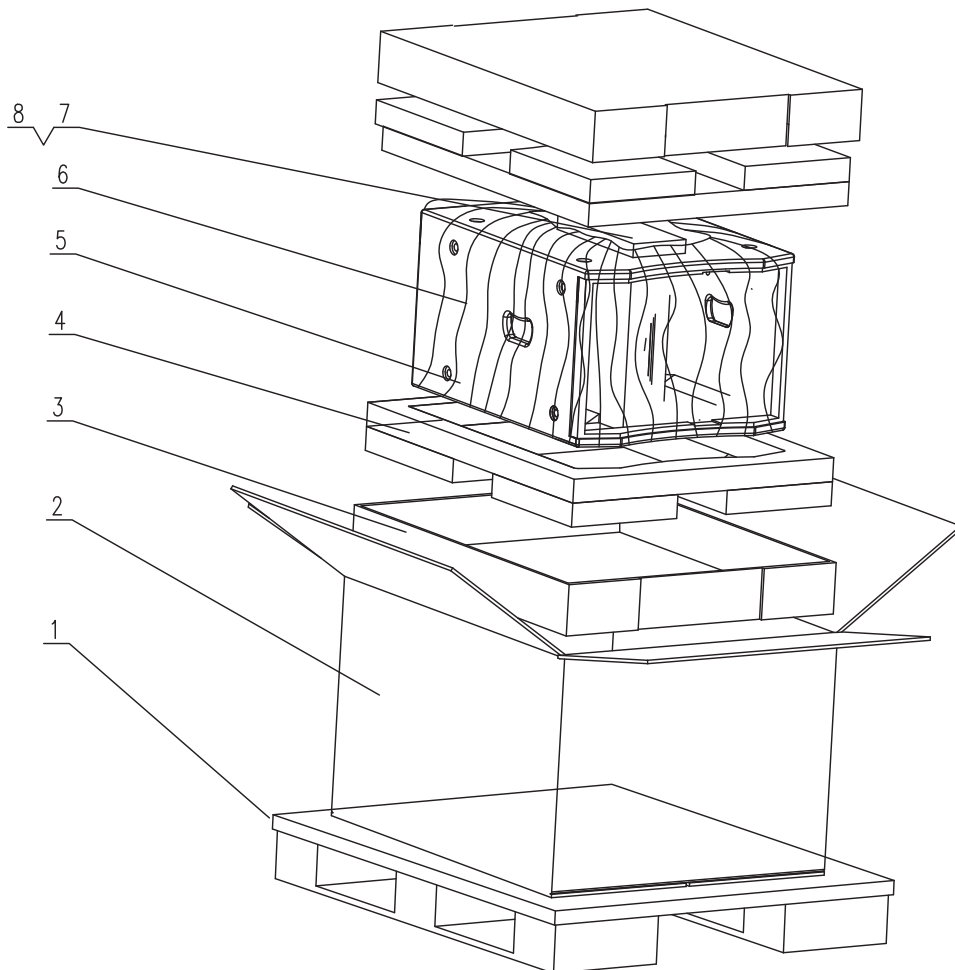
Panaray LT MB12 WR Bass Loudspeaker Packaging View
